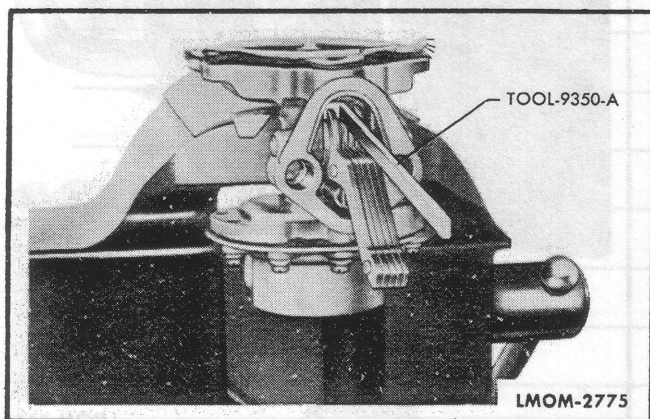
Hold Vacuum Diaphragm in Position with Tool 9350-A.
